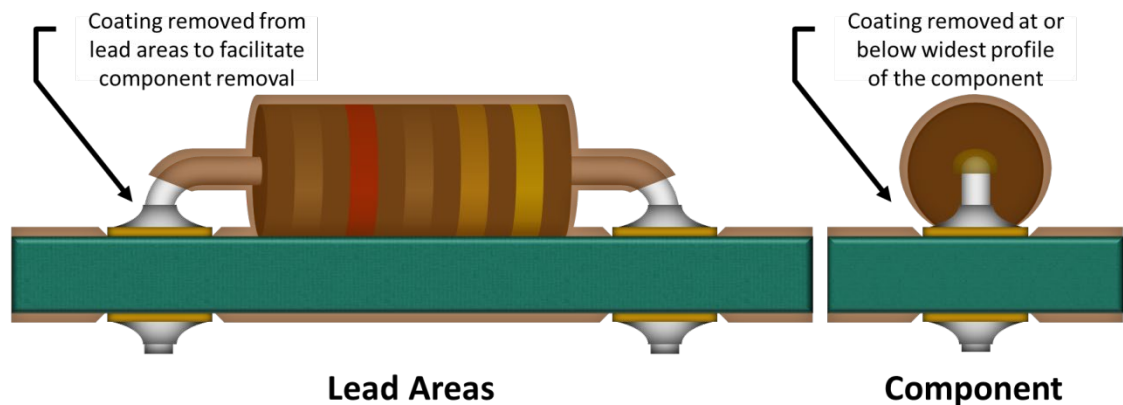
Conformal Coating Removal from Encapsulated Discrete Components
